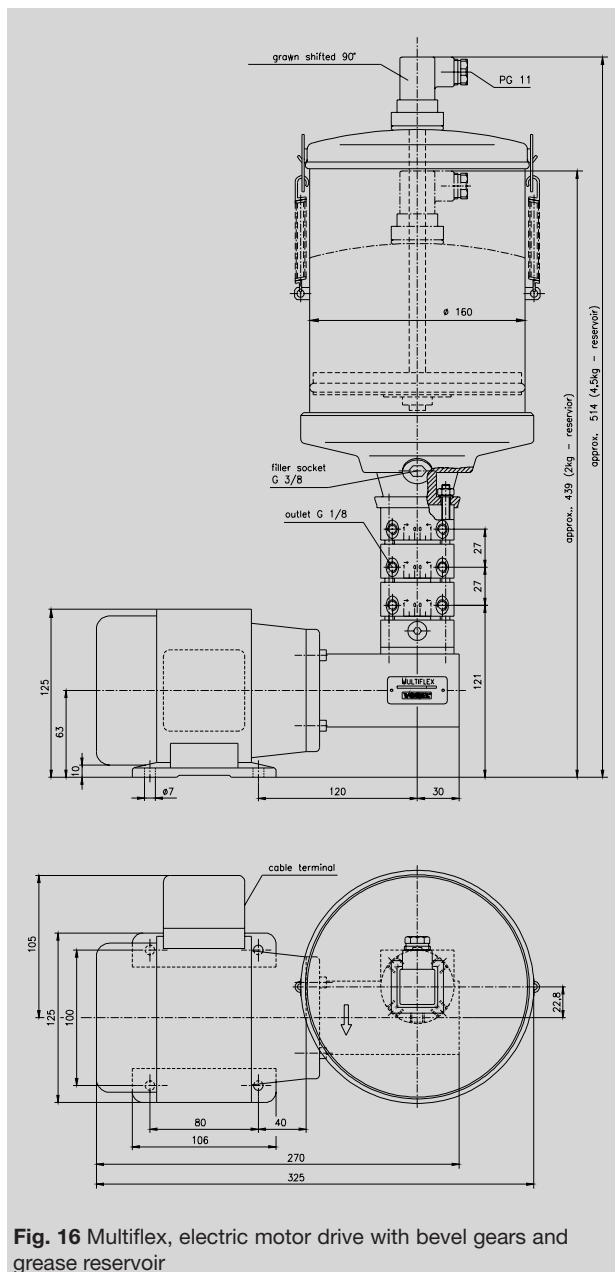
Multiflex, electric motor drive with bevel gears and grease reservoir
